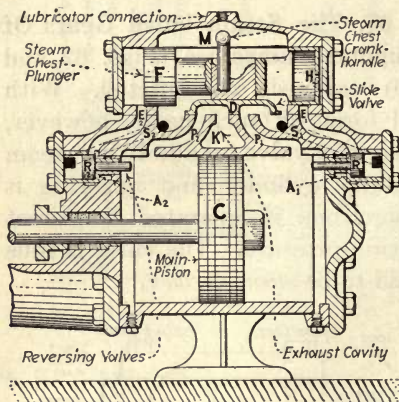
Sectional Elevation Of Steam-End Of Cameron Direct-Acting Simplex Steam-Pump, Showing Inside-Operated Valve Mechanism.
